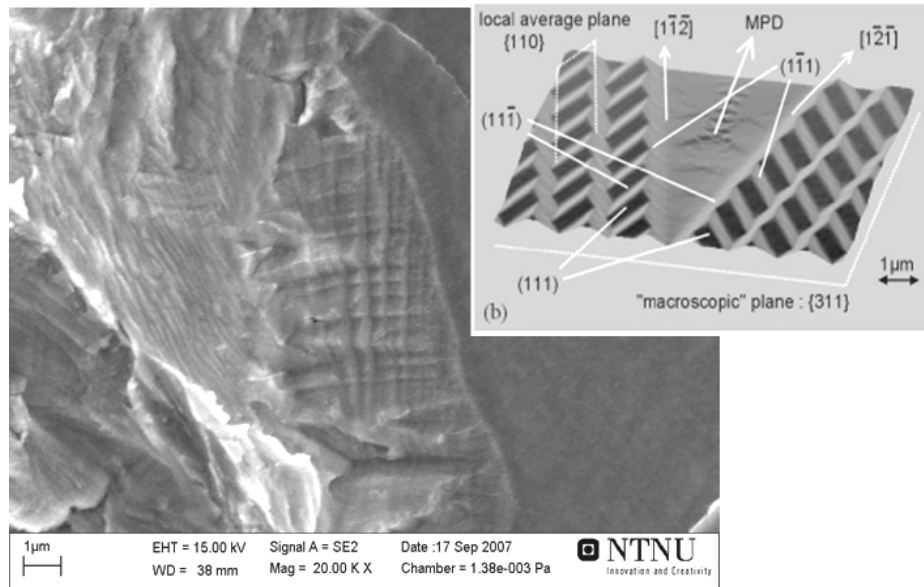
Cleavage fracture in austenite phase of fractured sample compared to typical feature of zig-zag cleavage crack pattern of hydrogen charged AISI 316 stainless steel reported by Delafosse & Magnin [11].
